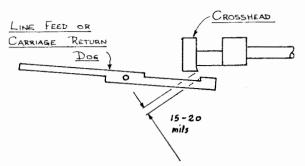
Clearance, line feed/carriage return dogs and cross head pawl.
